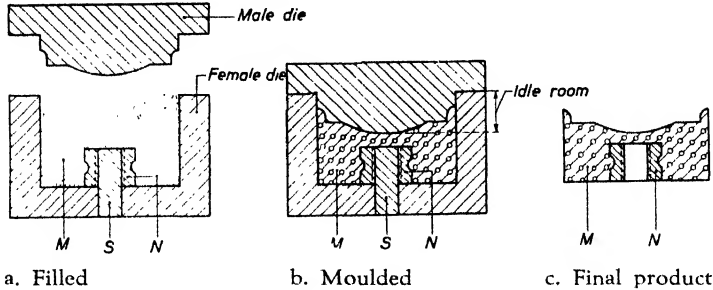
Process for moulding the product M with pressed-in nut N; S = stift; m = moulding compound.
